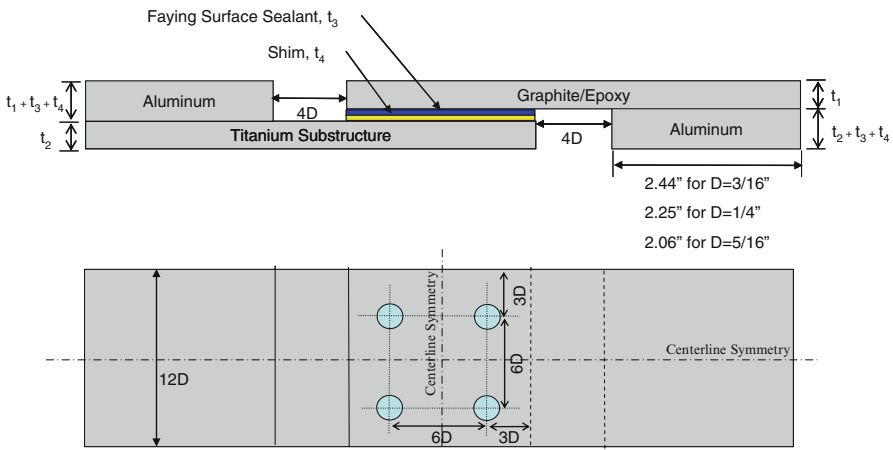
Single-shear bolted joint sub-element test specimen
